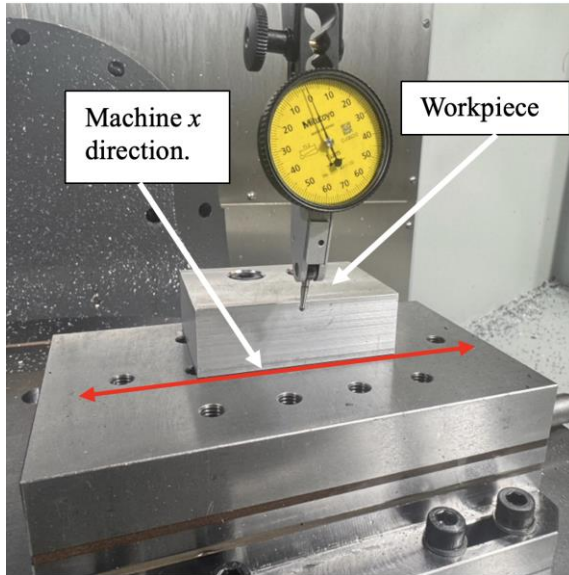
CMD workpiece alignment to the machine x axis with stainless steel plate.
